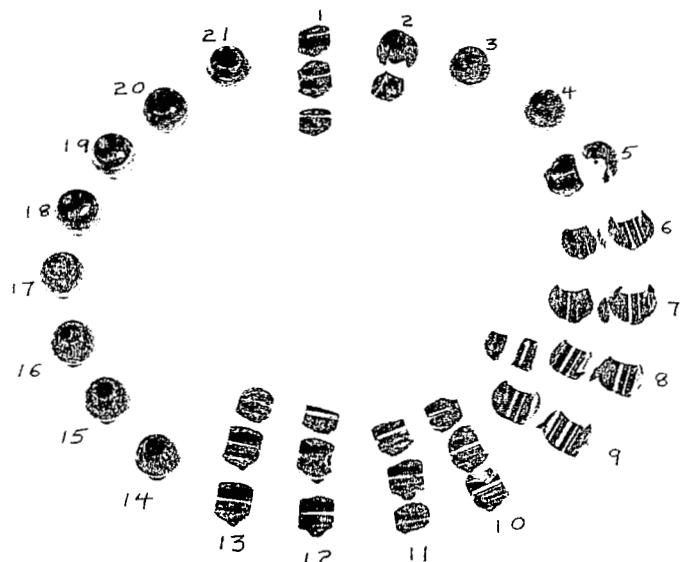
Appearance of Twenty-One Damaged Drilled Balls – Drilled-Ball Bearing
